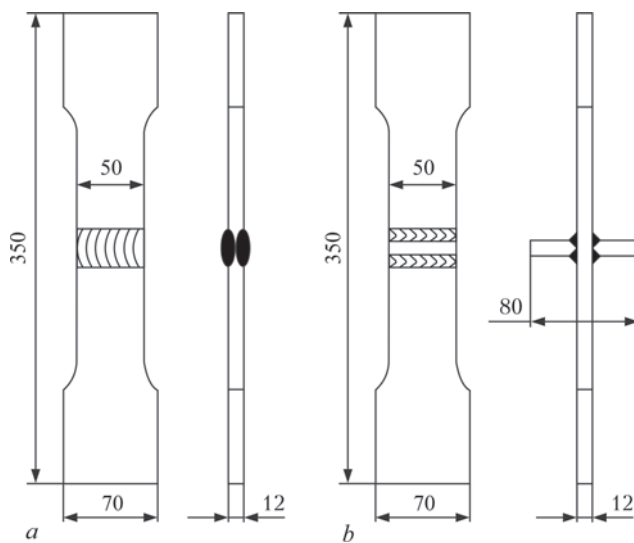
Samples of butt (a) and tee (b) welded joints
